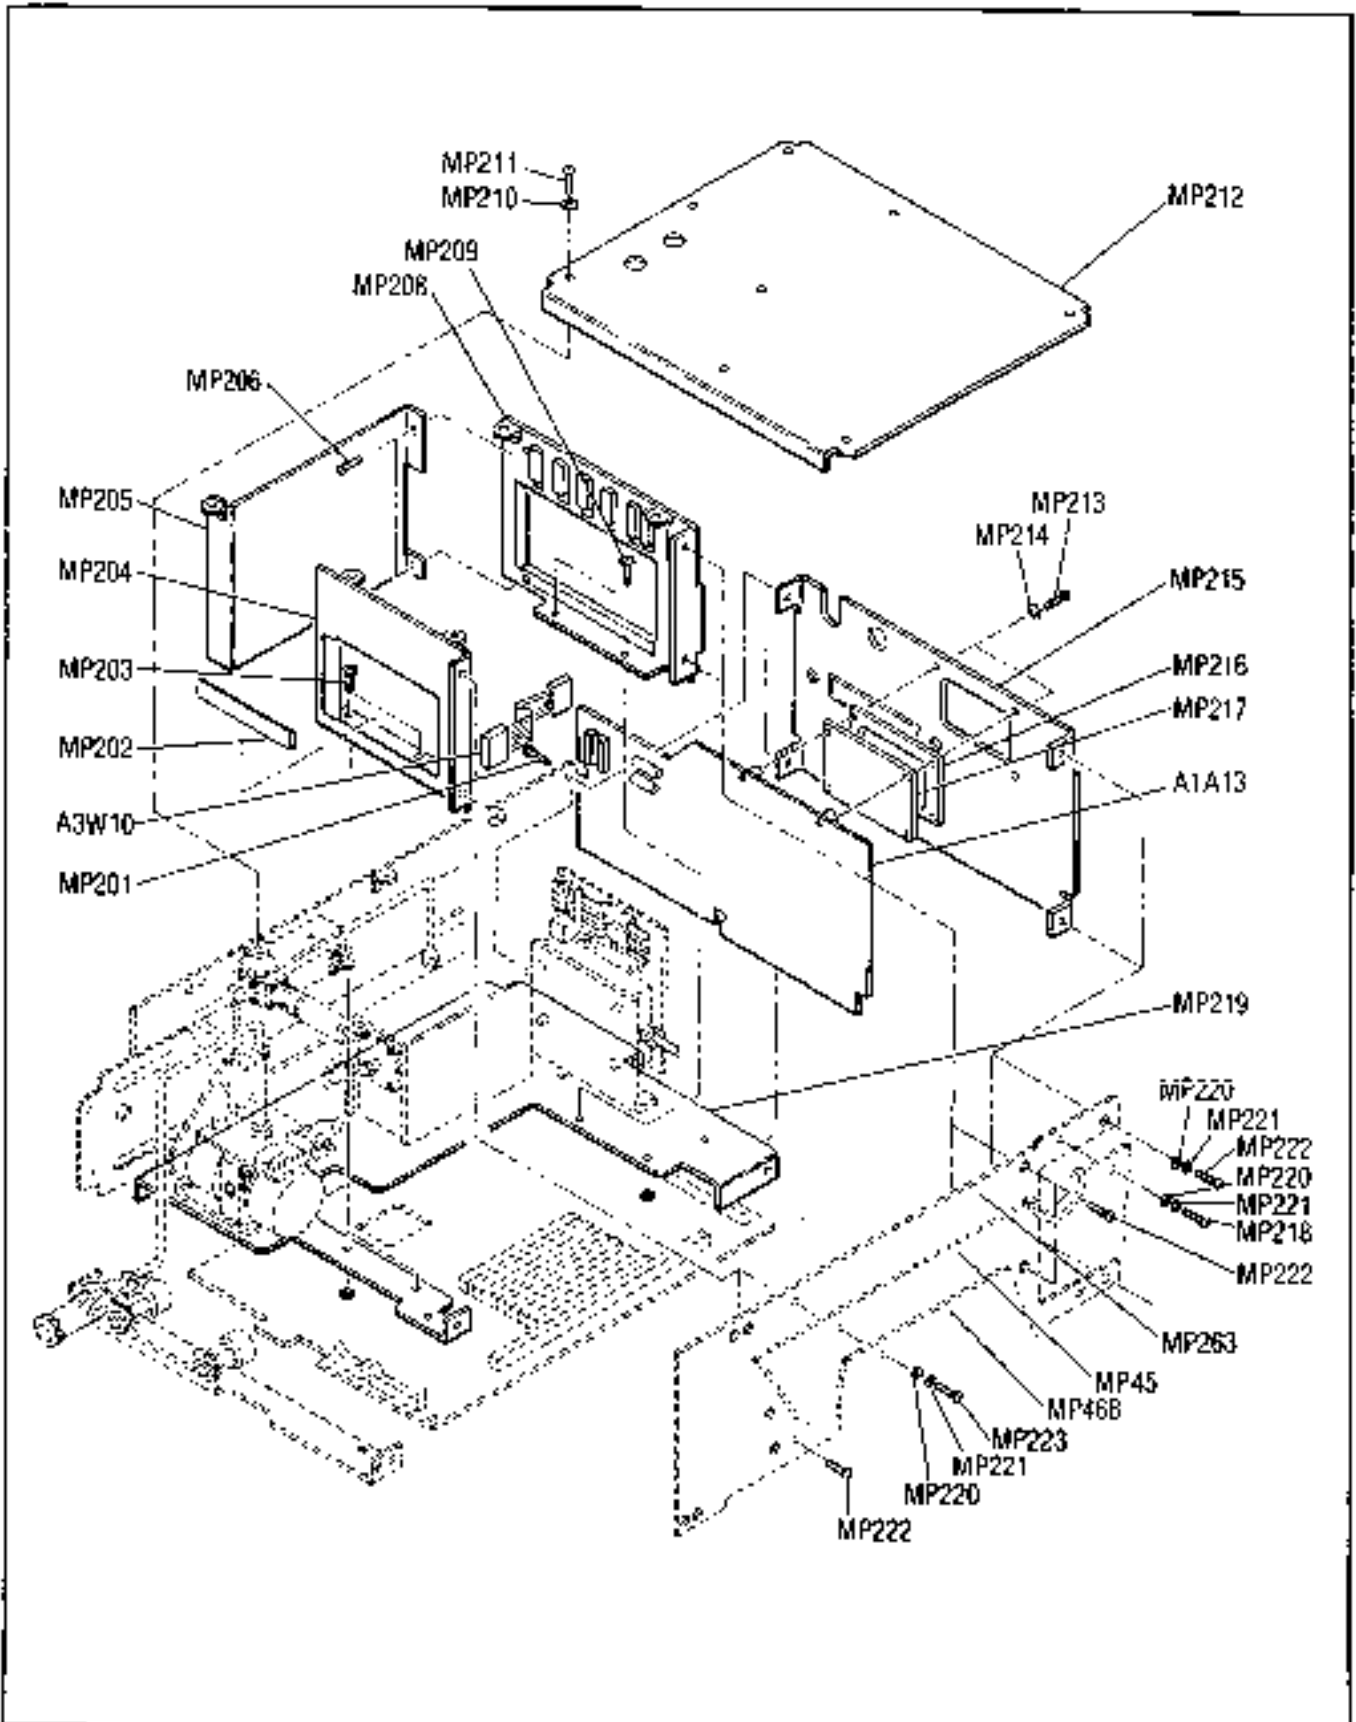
AI Card Cage Illustrated Parts Breakdown
